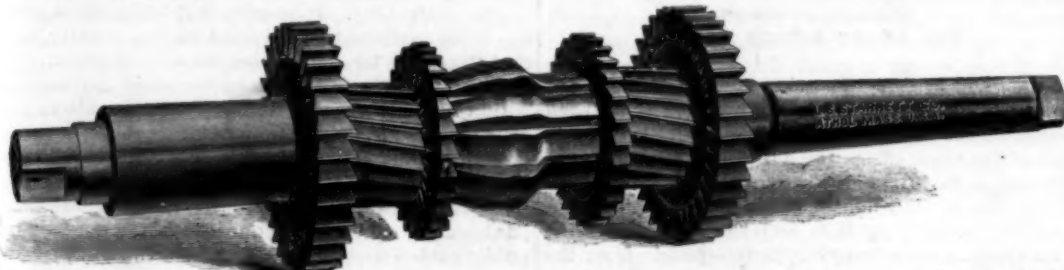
STARRETT'S GANGS OF MILLING CUTTERS.
